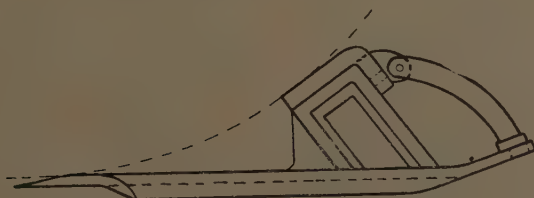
Brake shoe with welded sole plate.
